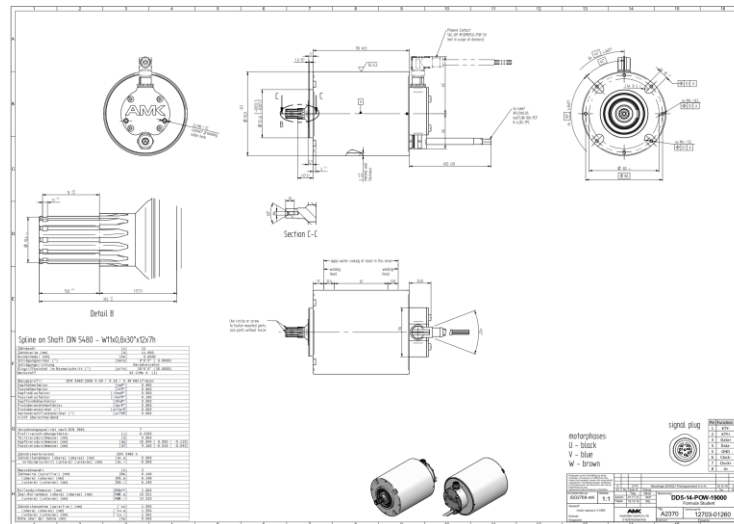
Technical drawing of the AMK DD5-14-POW-19000 motor.
